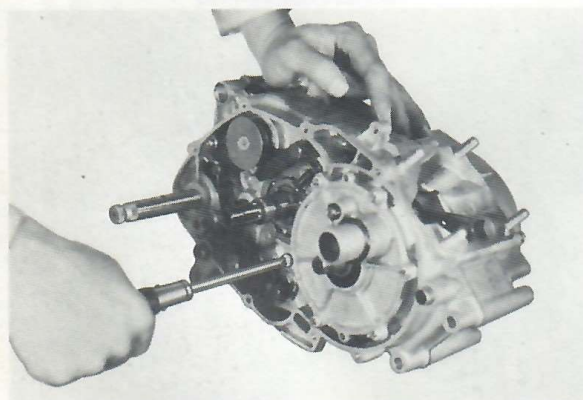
Loosening outer valve seat fitting screws with cross head screw driver
